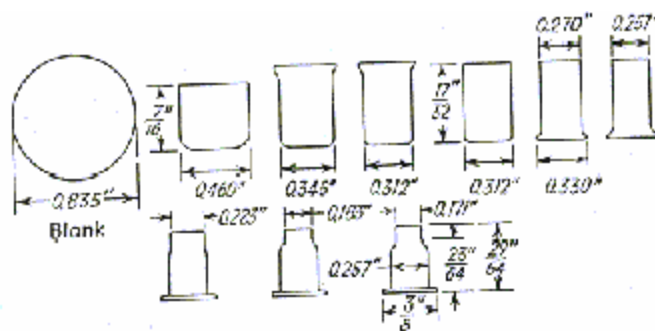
steps used in producing a necked and flanged shell on an eyelet machine.
